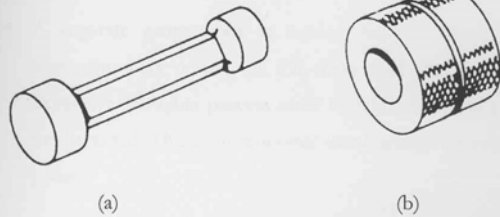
Cylindrical limit gauges (a) plug gauge for round holes (b) ring gauge for shafts (Farago 1982)
